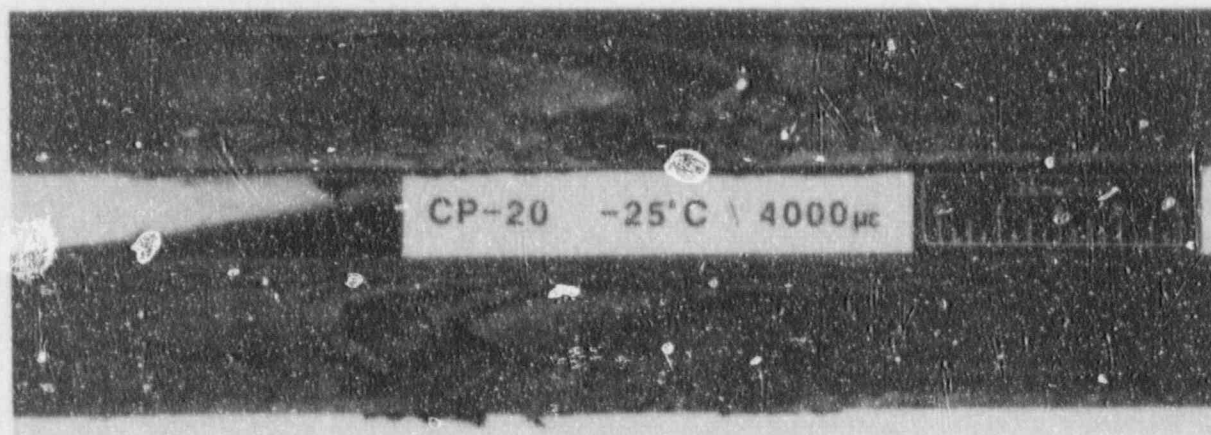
Fracture surfaces of clad plate CP-20.
